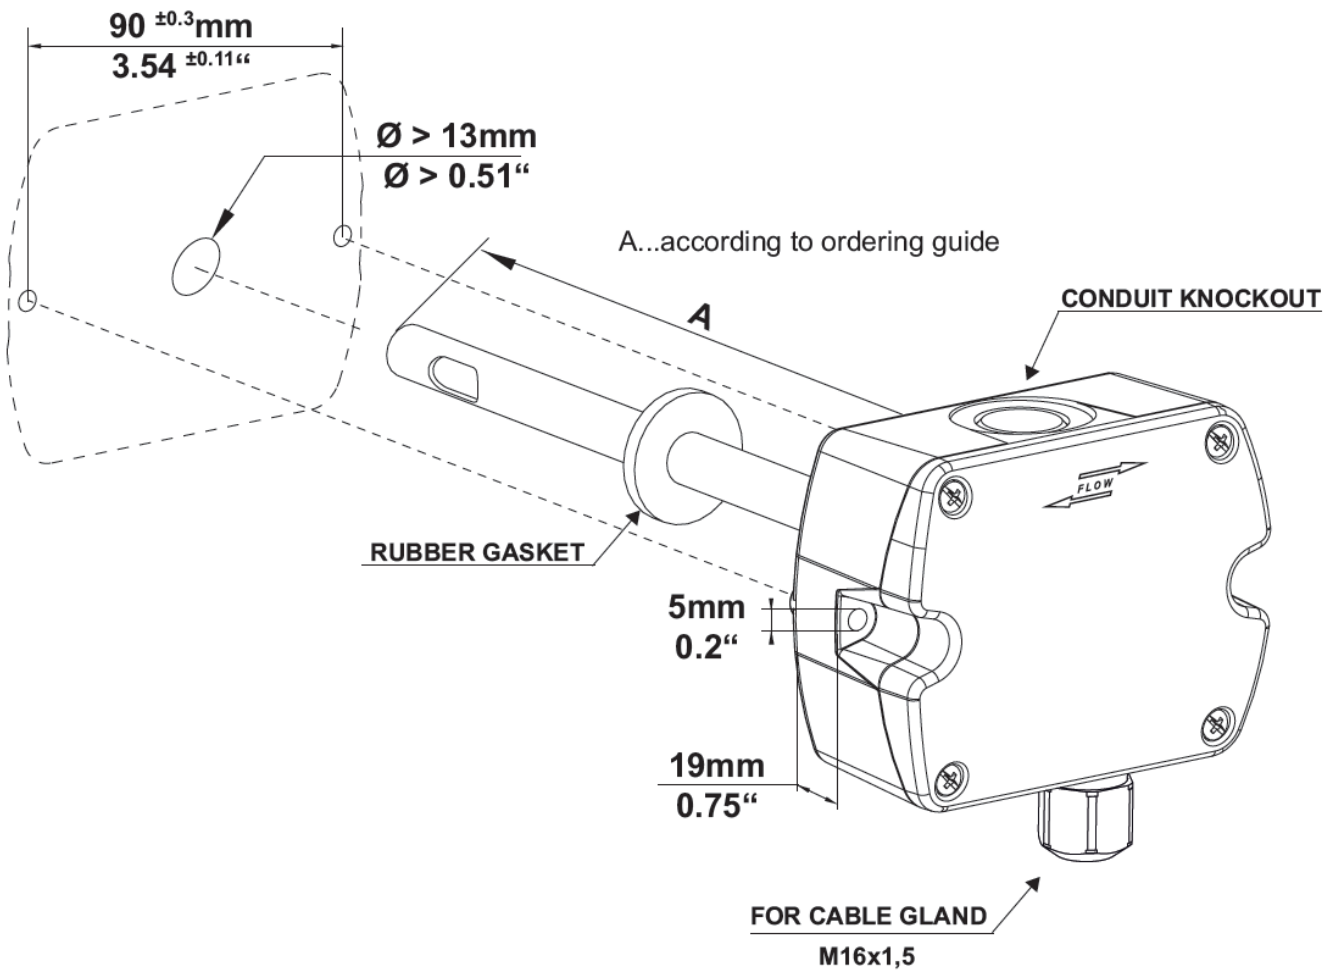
Direct mounting on duct (probe length A = 200 mm)
